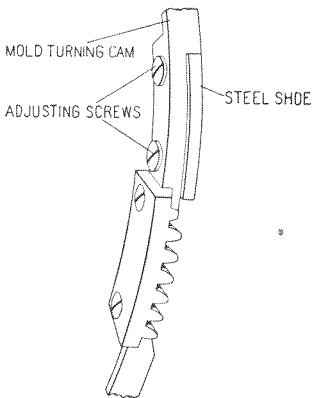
Segment of the rack which revolves the shaft turning the mold disk.
